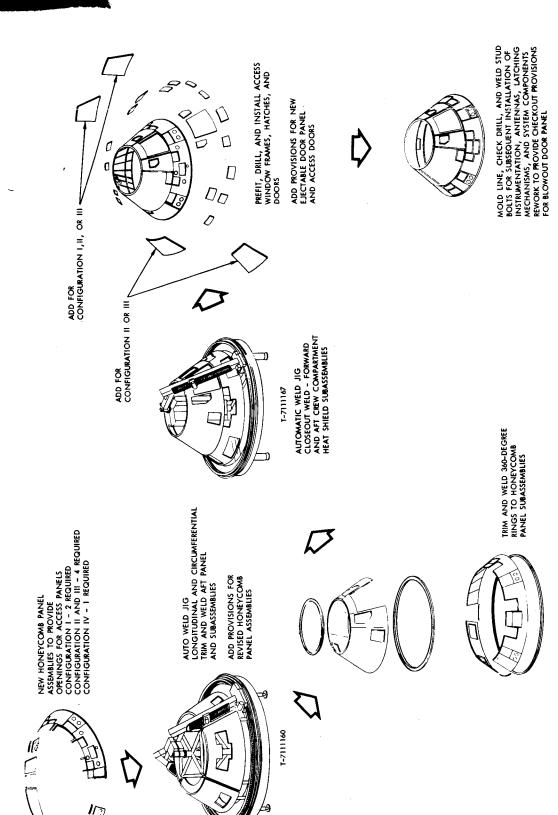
AES Crew Compartment Heat Shield Structure Assembly
